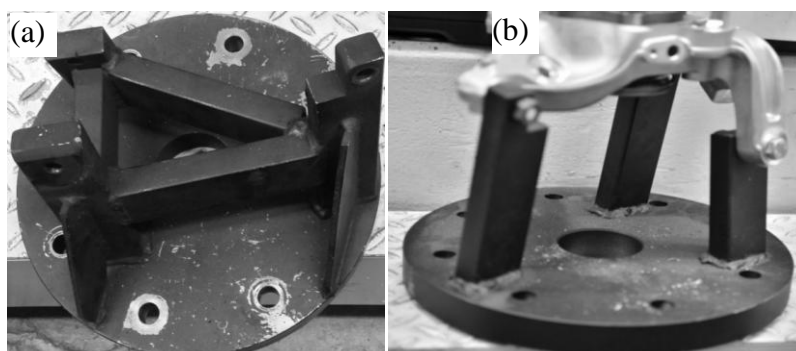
(a) The stiffer adapter and (b) the flexible adapter for the wheel brake
